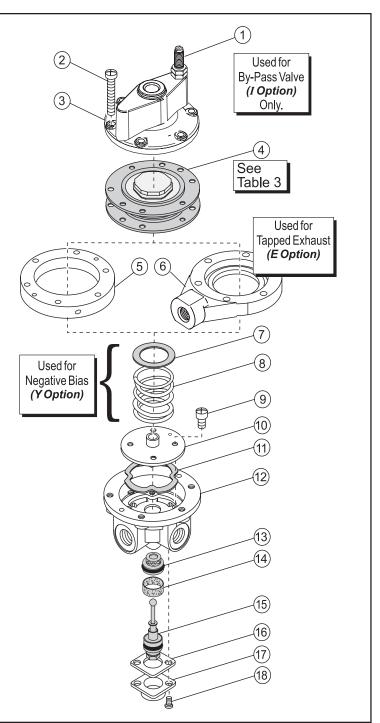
Exploded Drawing for 1:1, 1:2, 1:3, 2:1, & 3:1 Ratios.
